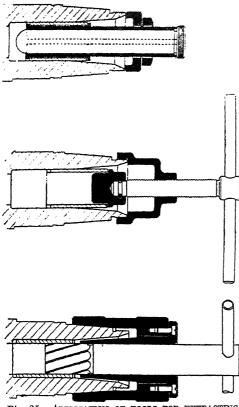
Application of tools for extracting, pressing in, and reaming airscrew shaft steady bush.
